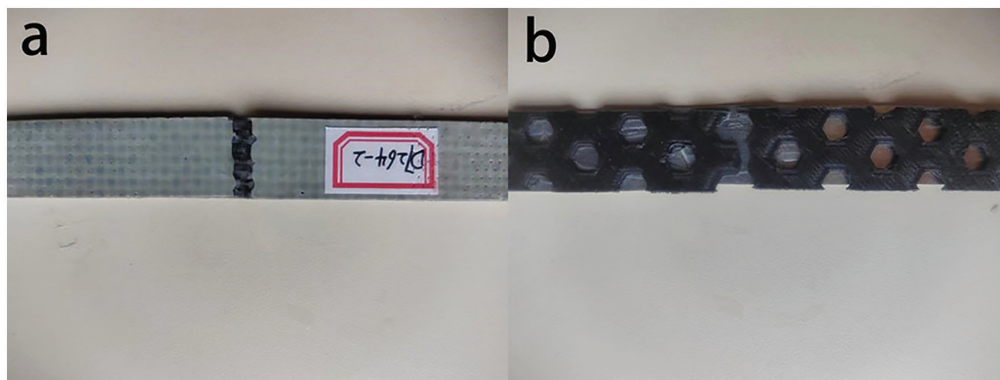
Macrostructure after tensile test: (a) Molding process specimen; (b) 3D printing process specimen.
